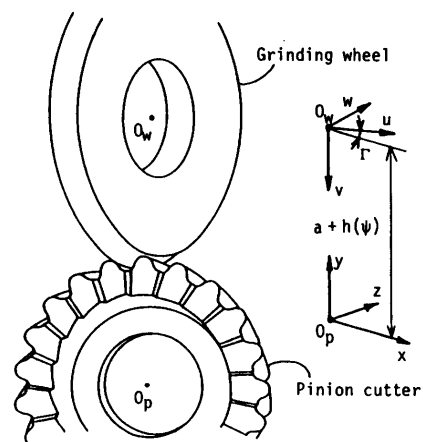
Coordinate system used to calculate wheel profile for finishing pinion cutter by relief grinding
